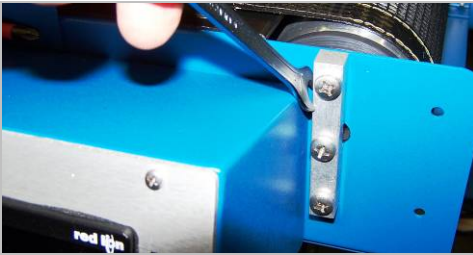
Tighten the Drive Roller Shaft Support Fasteners (top)
